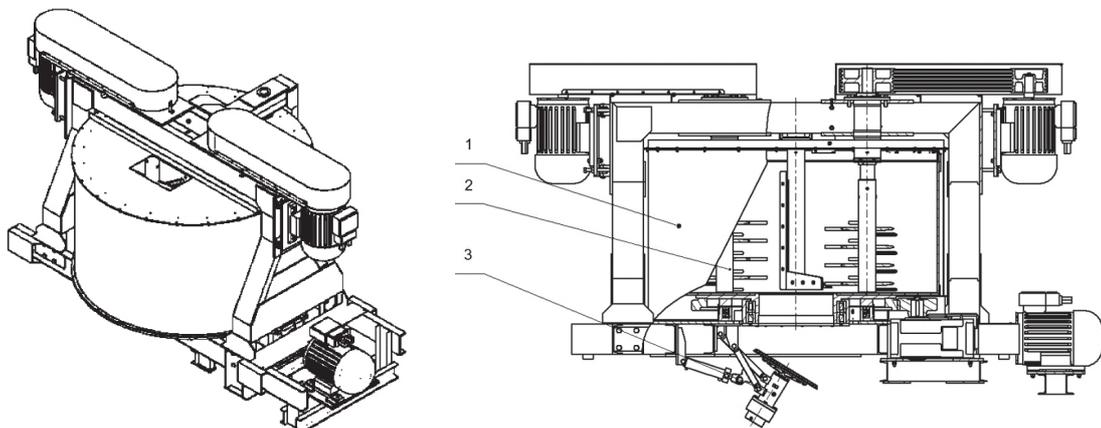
Coal slurry mixer: 1 – mixer drum; 2 – stirrer arrangement; 3 – drum-closing system
